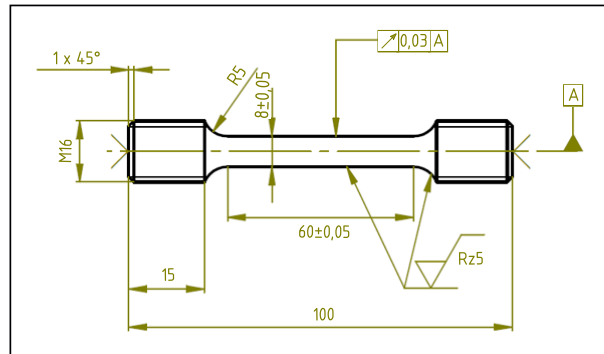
Drawing of creep specimen geometry with cylindrical gauge section, a diameter of 8 mm and $L_c = 60$ mm [143].
